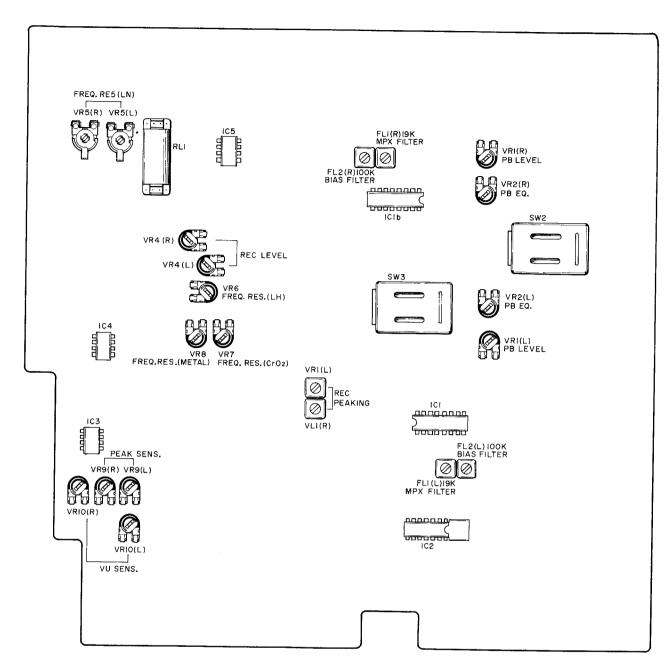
Adjustment Points Pre Amp P.C Board CL-5001A
